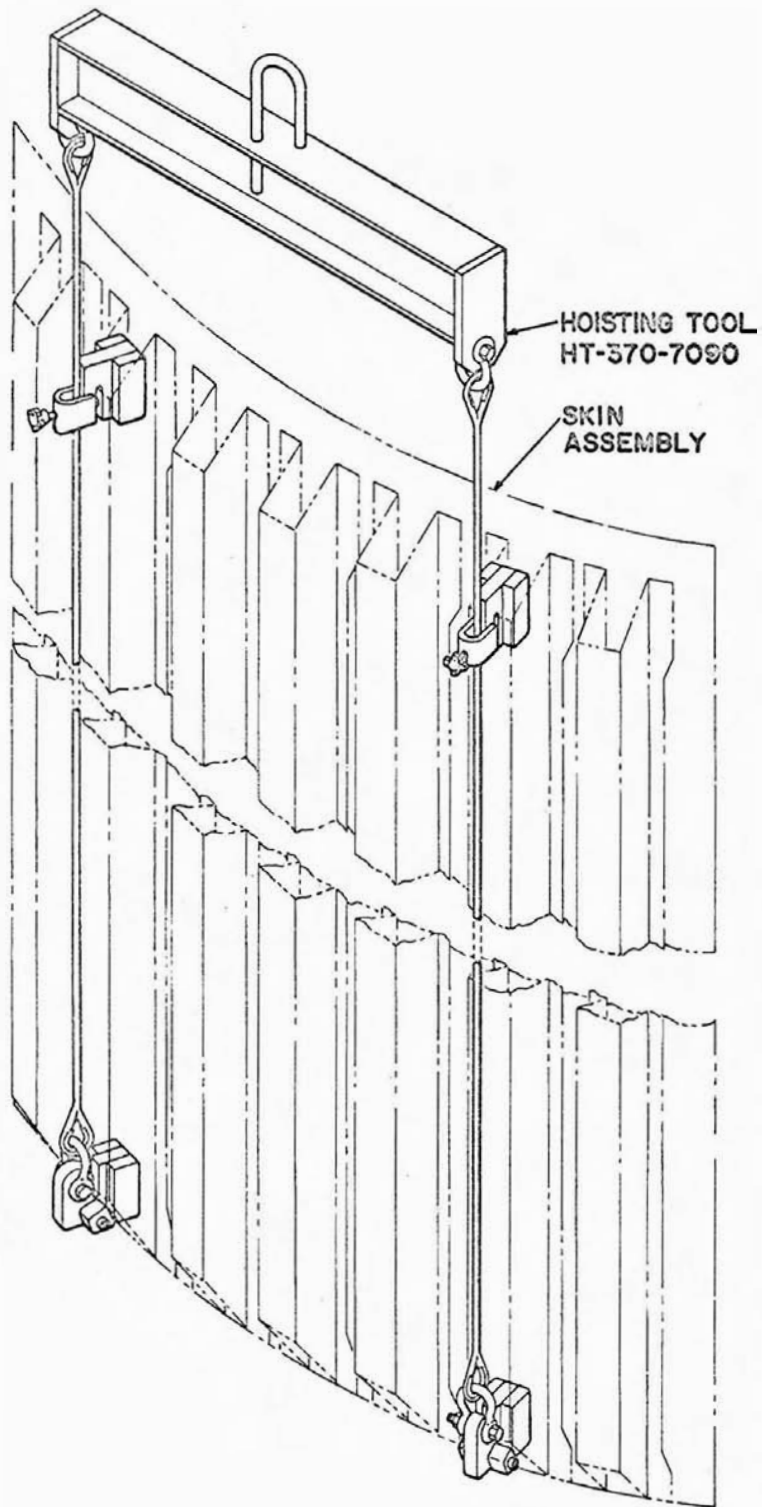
Thrust Structure Cylindrical Panels Hoisting Tool
